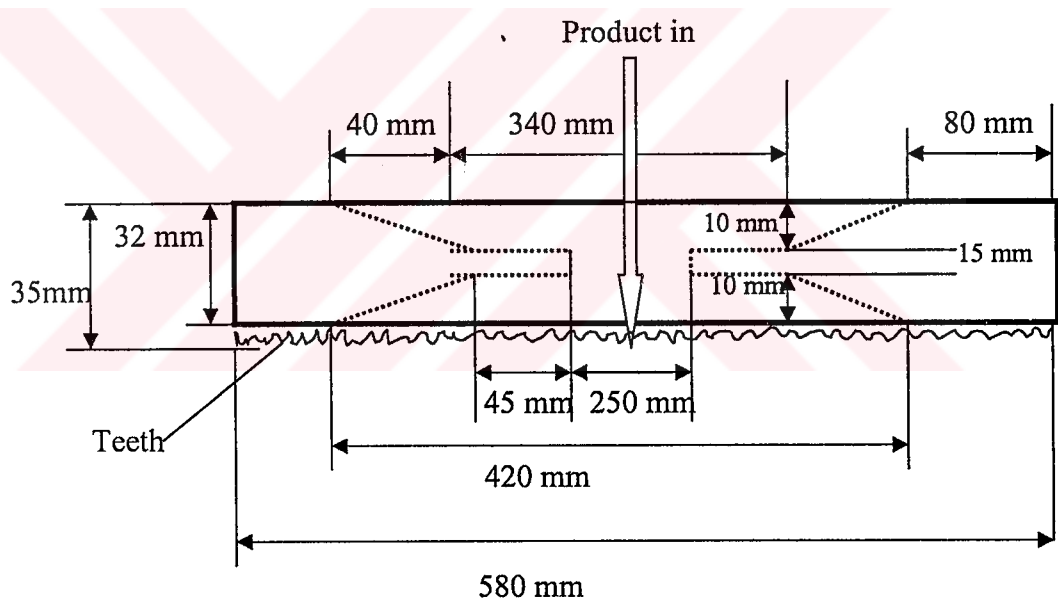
Illustration of dimensions of the top disc for disc mill
